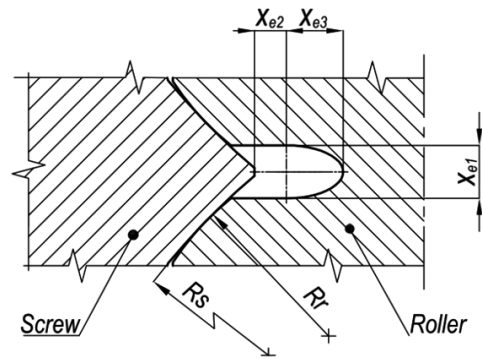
Design variables and dimensions of threads with elliptical undercut
